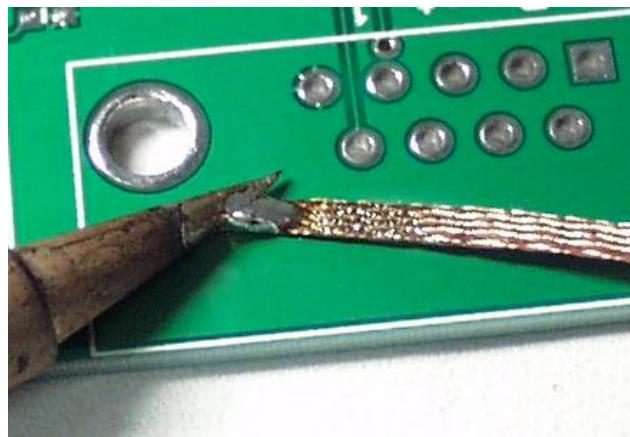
Solder Iron and Solder Wick Used to Remove Solder
